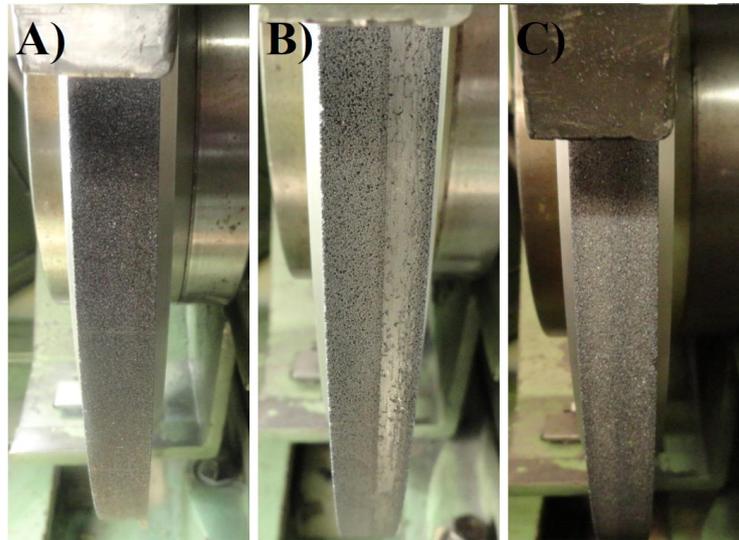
Grinding wheel after the grinding process under: A) conventional cooling, B) MQL without cleaning and C) MQL with cleaning.
